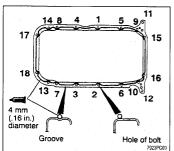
Apply sealant and tighten the bolts in the order shown—3.5L engine, upper oil pan shown
